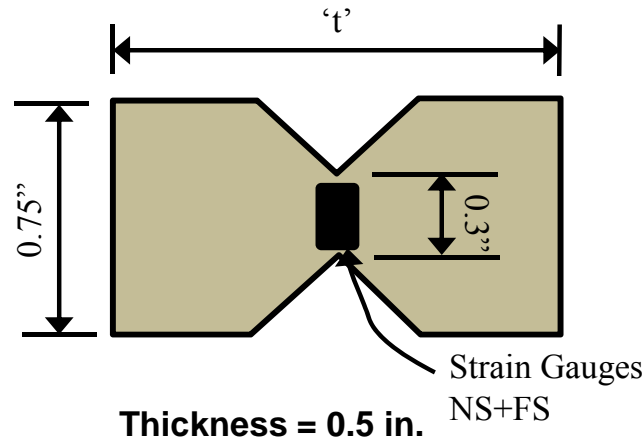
Out-of-Plane Shear Test Specimen Dimensions and Strain Gauge Locations
